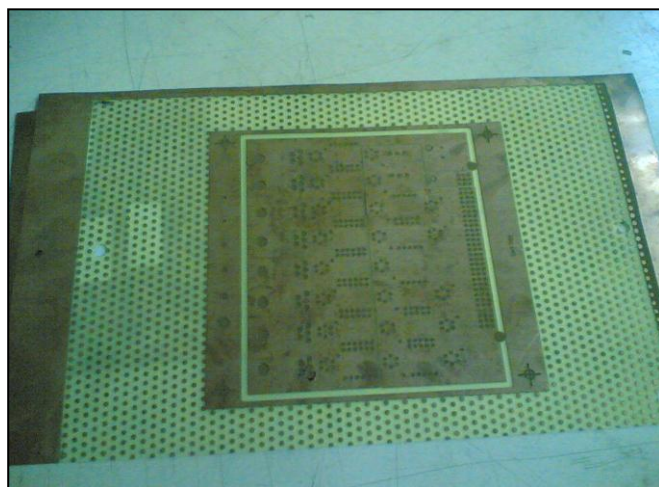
A photograph of a multilayer base material with copper (after print and etch) (the dark area at the preferential is out of use and will be removed)
